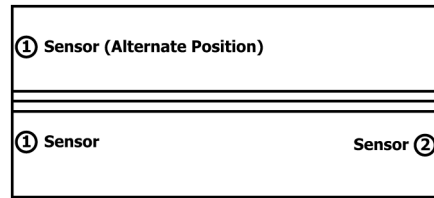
Typical Sensor Placement for Two-Channel AE Monitoring of a Linear Weld
